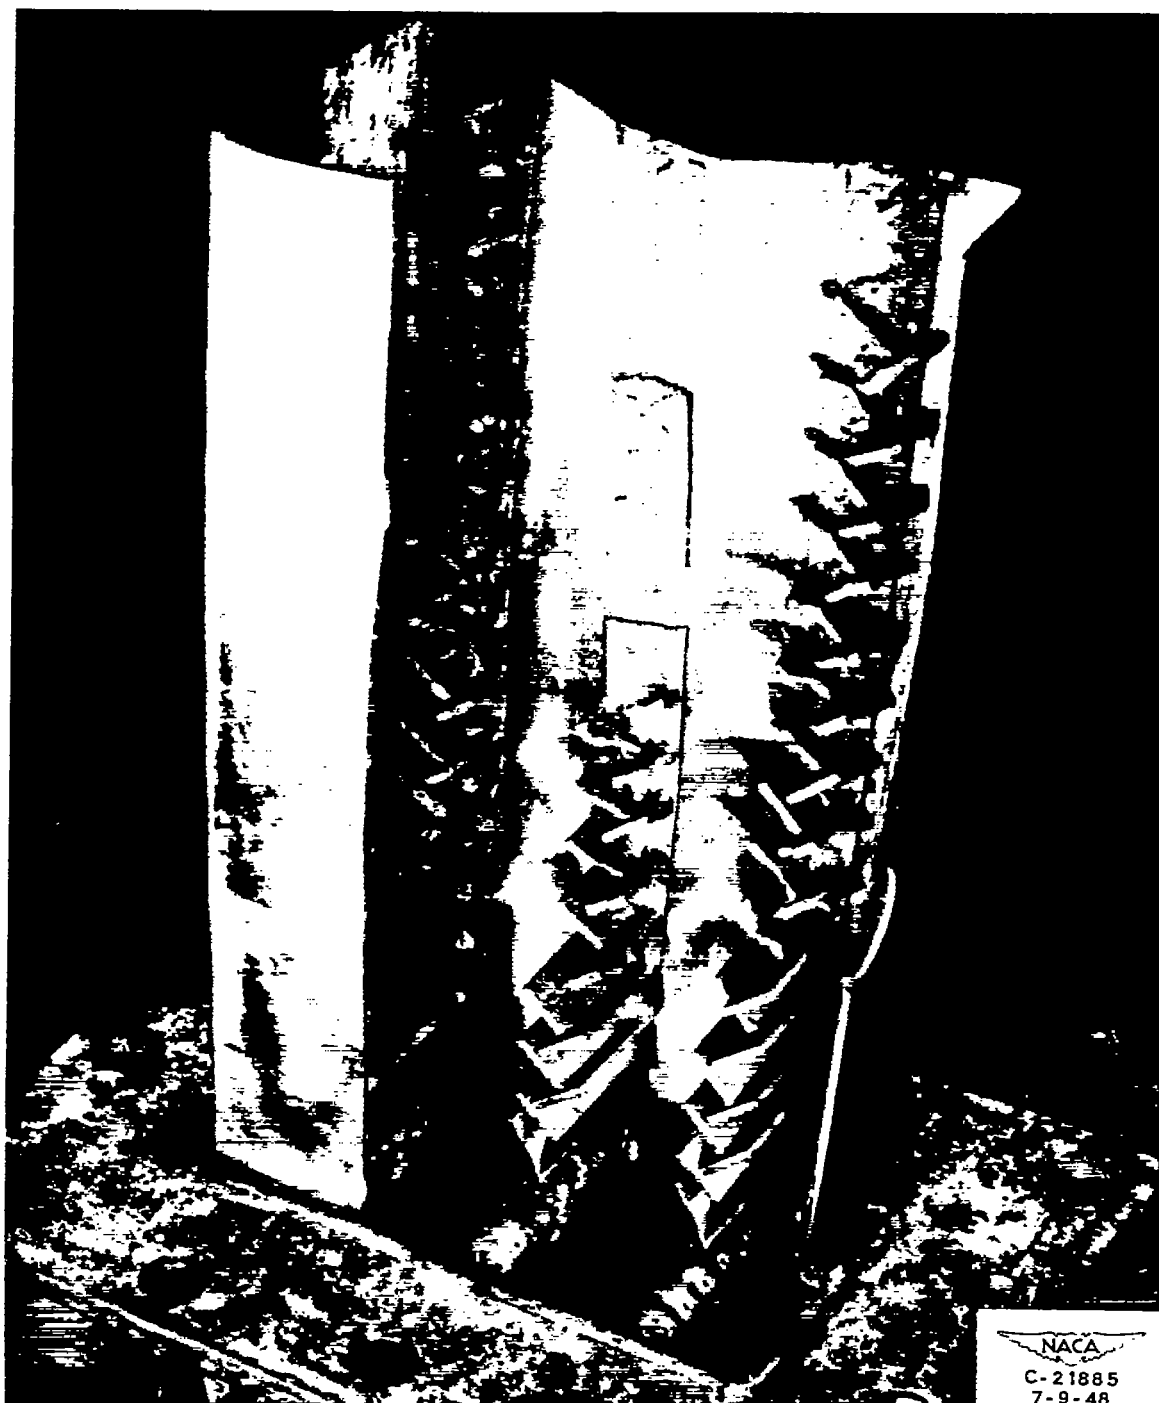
Cutaway view of flame holder 9 showing position of fuel-discharge bars.
